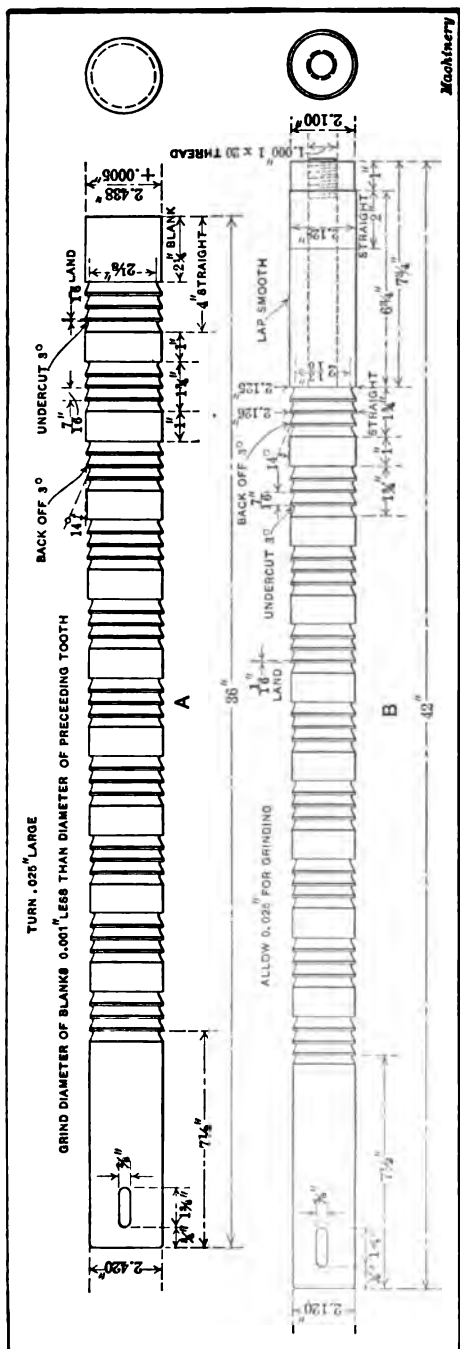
Broaches used for Connecting-rods shown in Fig. 23
